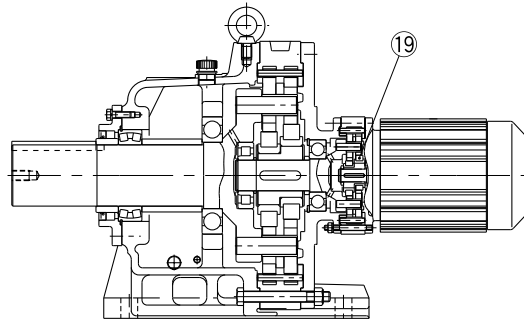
Type CHHM (Horizontal, Gearmotor)
